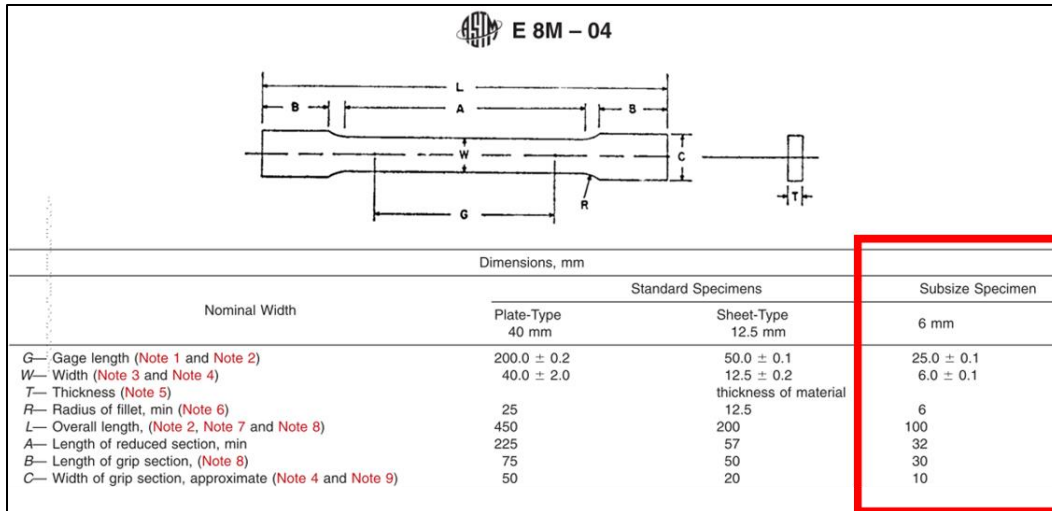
ASTM E8M-04 standard for machining of sub-size tensile specimens.
